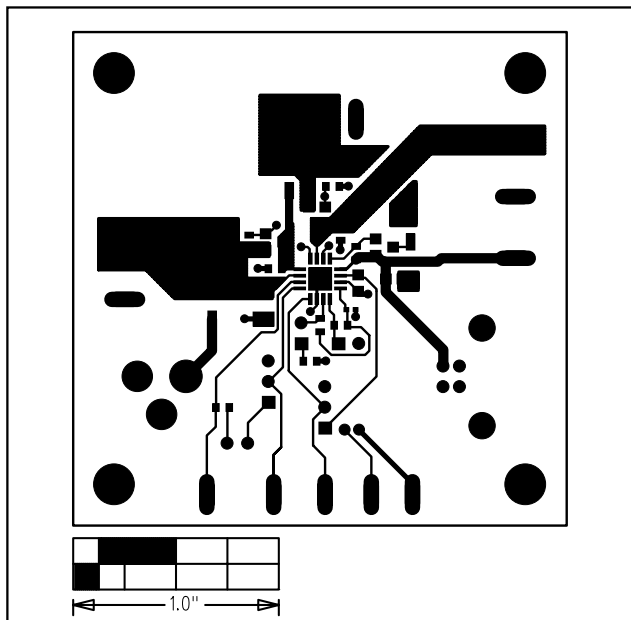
MAX1874 EV Kit PC Board Layout—Component Side
